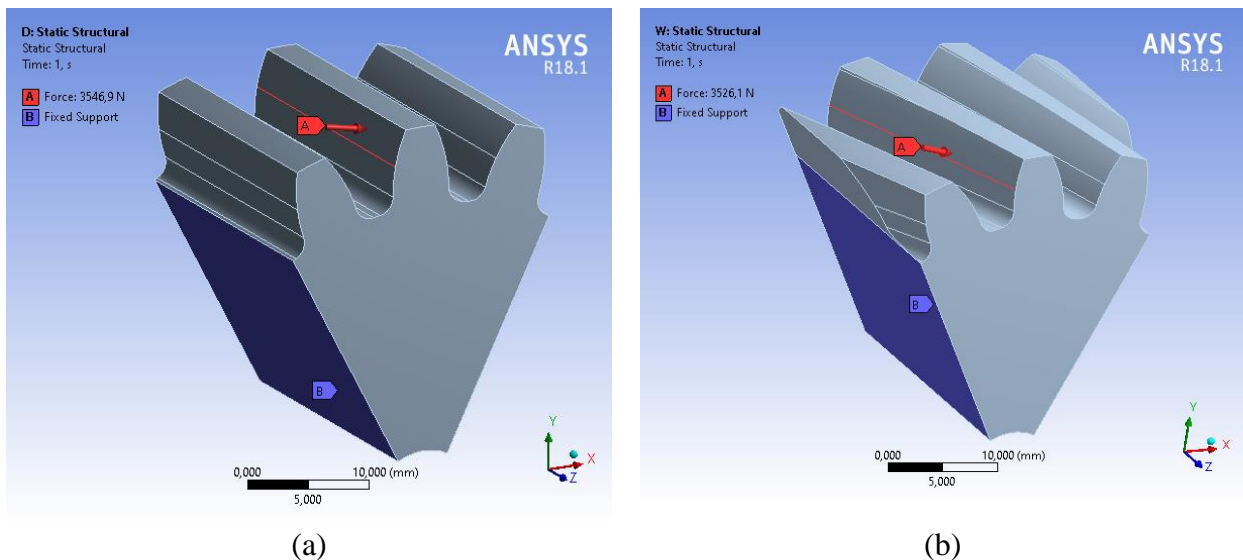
Boundary conditions of the FEA model; (a) spur gear, (b) helical gear
